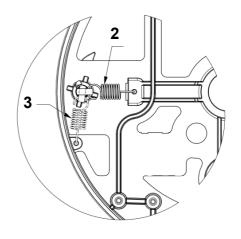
Locking mechanism of the aluminum cable rewinder for type 601KR/DW and 601KR/EW
